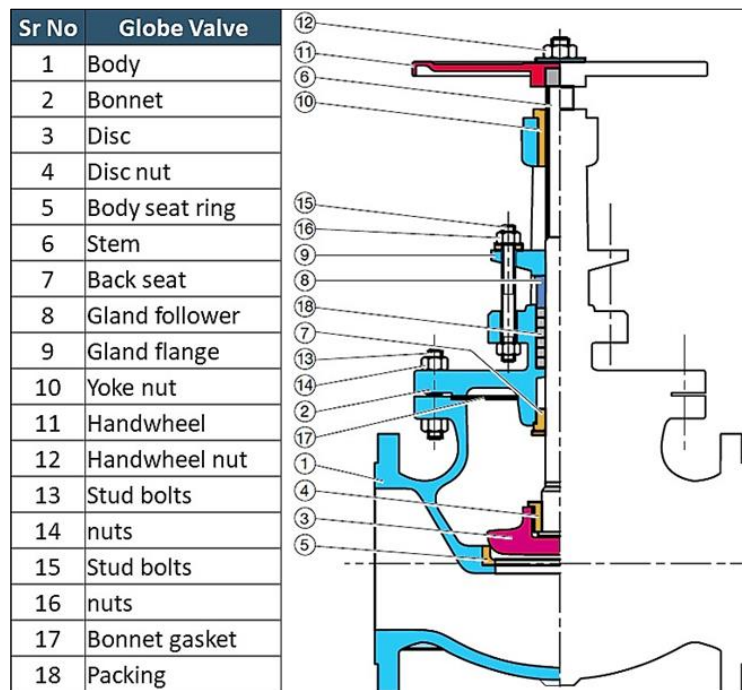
Parts of Globe Valve Existing type (Welding Yoke)
